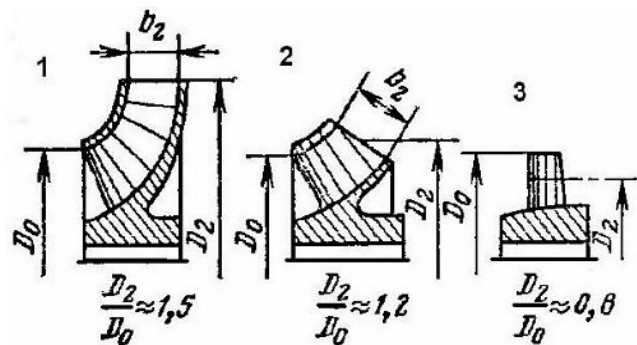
Types of high-speed pump working impellers: 1 - High-speed impeller, $n_s = 150 \div 300$; 2 - diagonal impeller, $n_s = 300 \div 600$; 3 - axial impeller, $n_s = 600 \div 1200$
